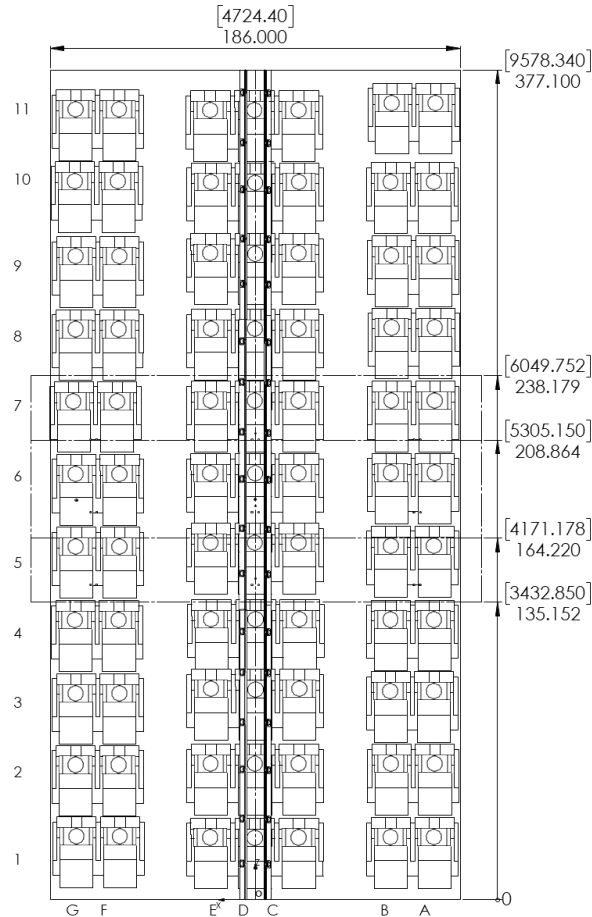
Cabin mockup seats layout and sections used as domain in CFD. Dimensions in inches.
